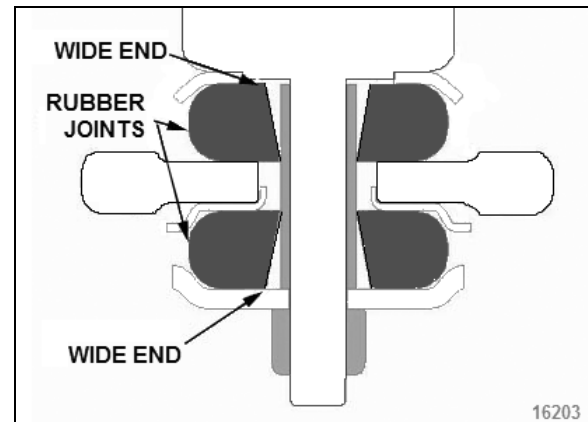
LOWER SHOCK MOUNTING BUSHINGS
